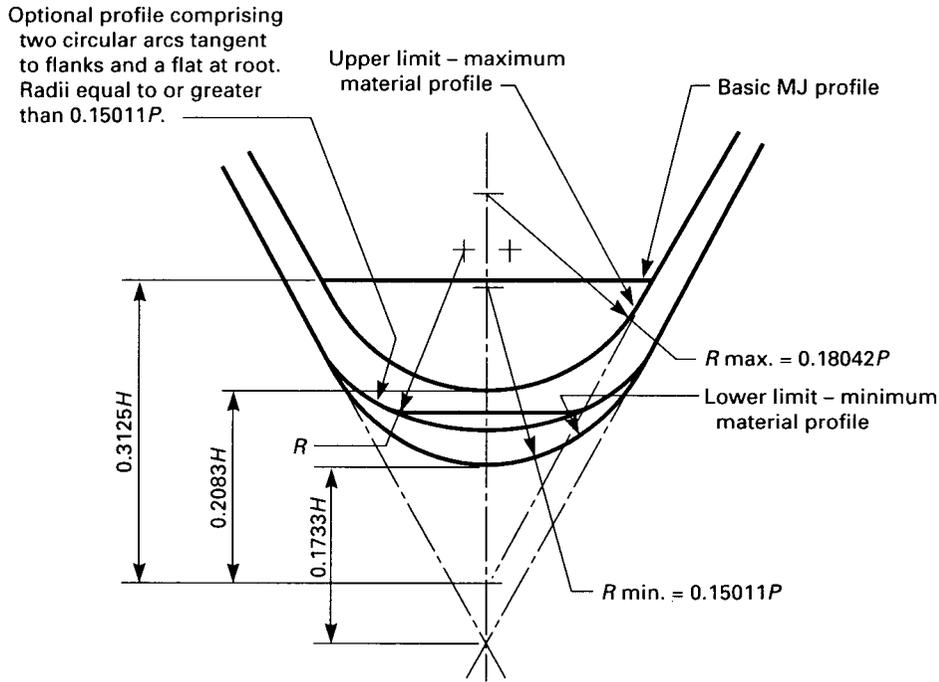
ROOT RADIUS OF EXTERNAL THREAD
